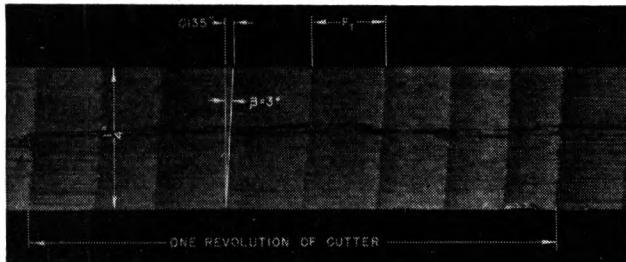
TOOTH MARKS ON A MILLED SURFACE
